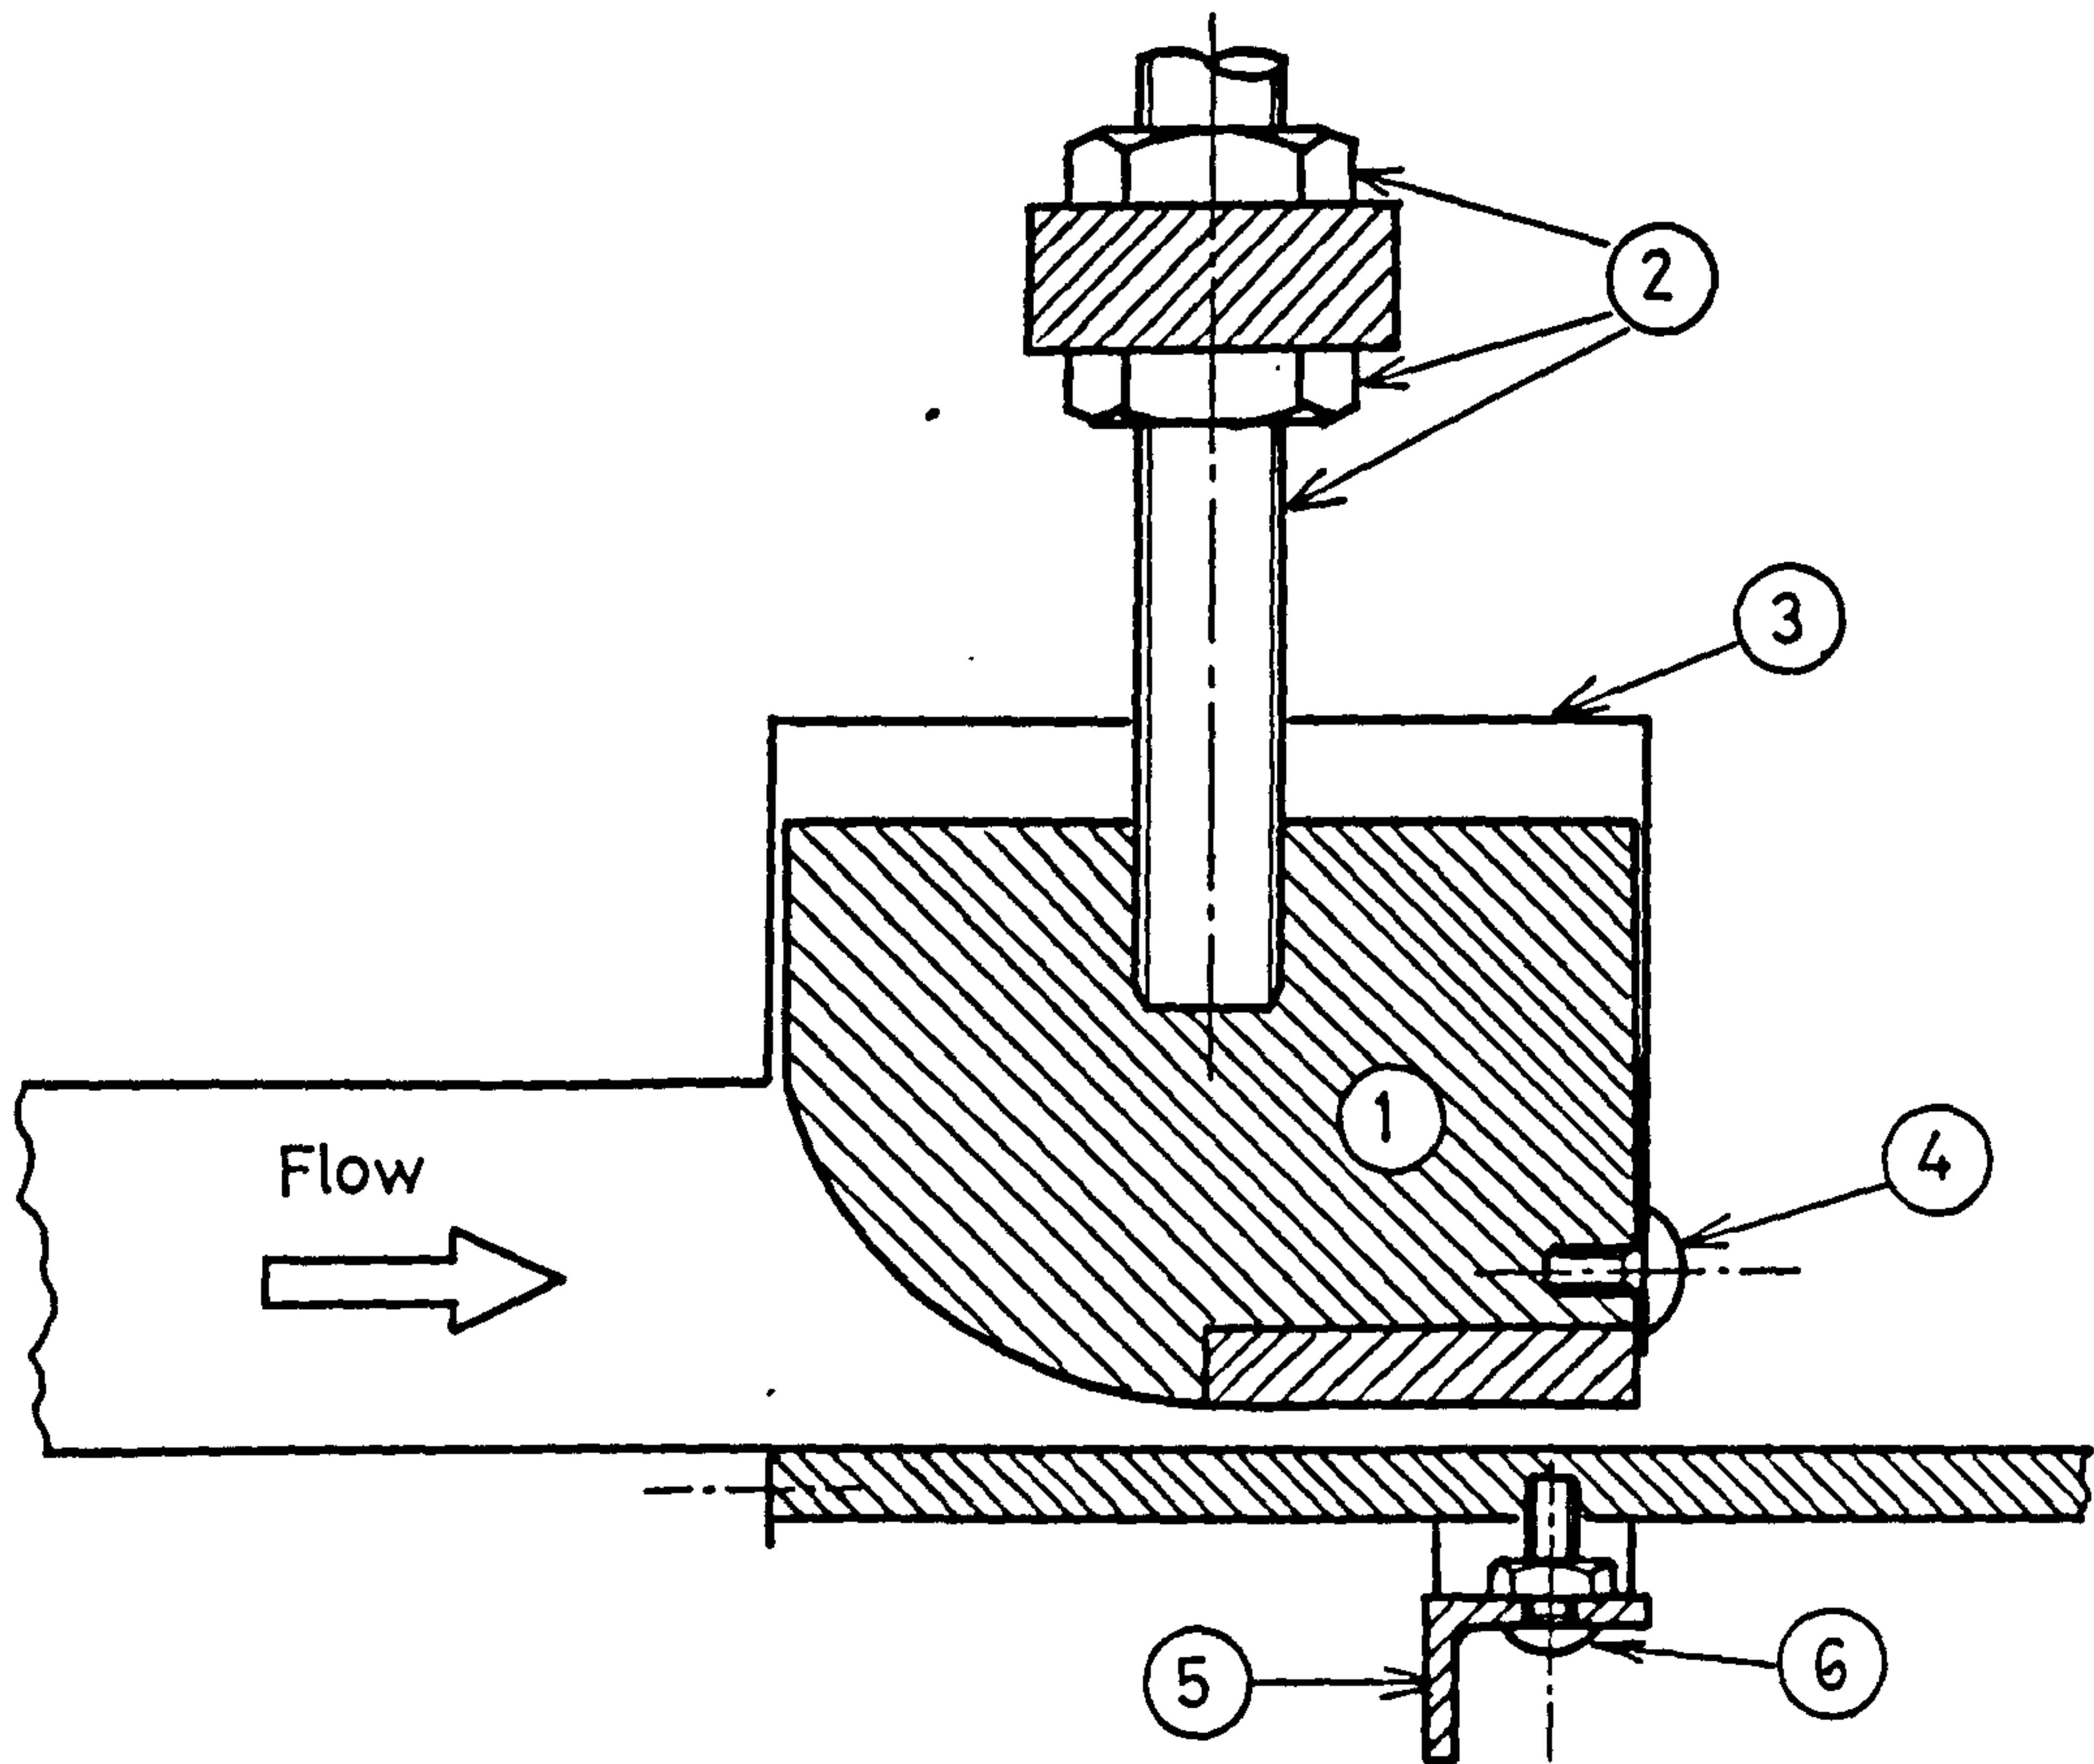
SECTION VIEW OF SLOT ASSEMBLY
